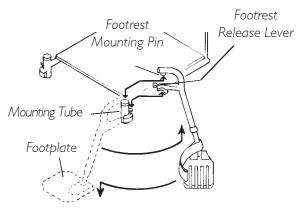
INSTALLING/REMOVING FOOTRESTS - 70°, TAPER
